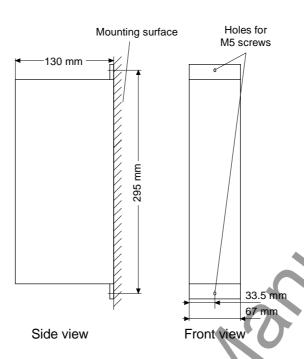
Dimension drawing of the 6 A EMC filter
